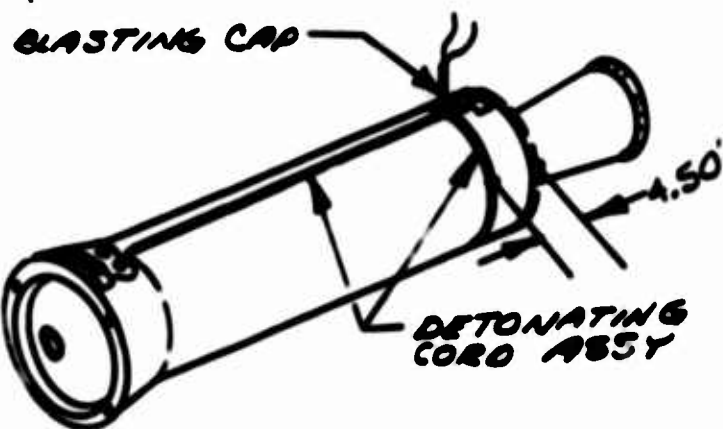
A SKETCH SHOWING THE POSITION OF THE DETONATING CORD ASSEMBLY FOR TEST 4.
